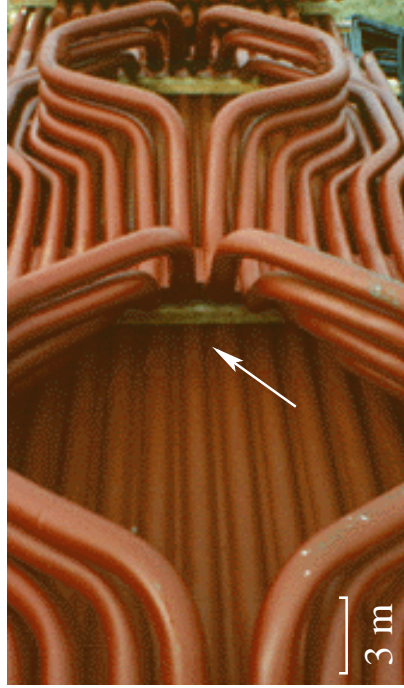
Complex shapes of boiler tubes used in power plant. The arrow shows two boiler tubes joined together with a supporting plate.
